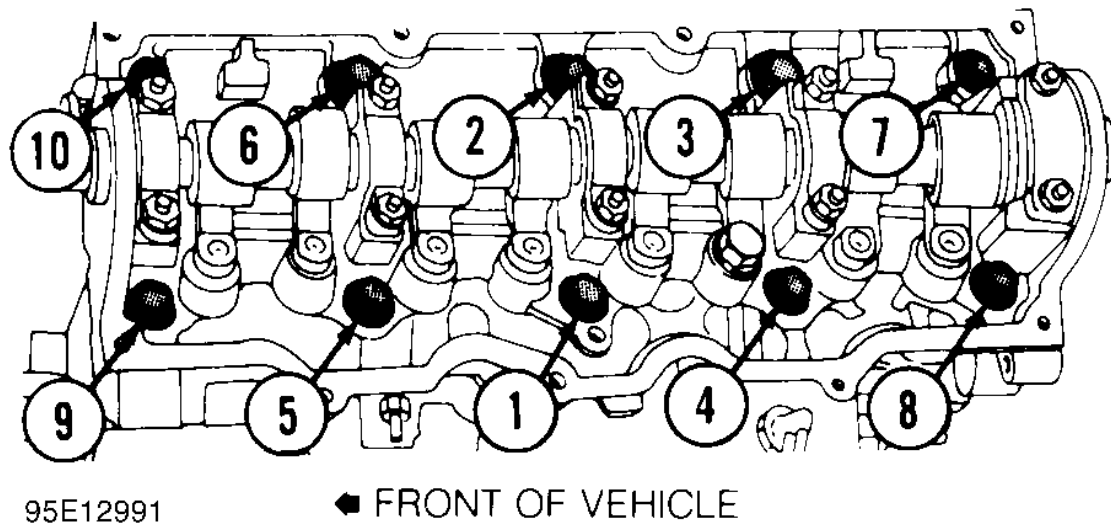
Typical Cylinder Head Tightening or Loosening Sequence
